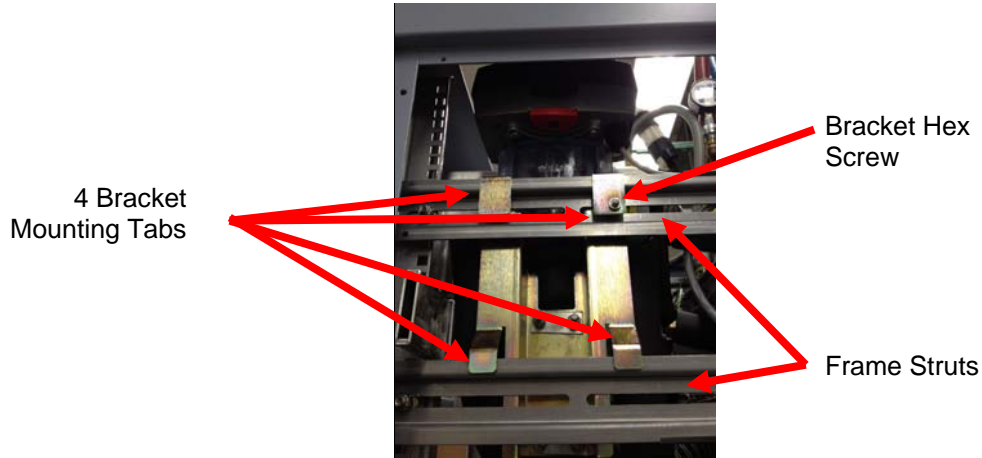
Rear View of Chilled Air Mixing Valve Installed in Cabinet
